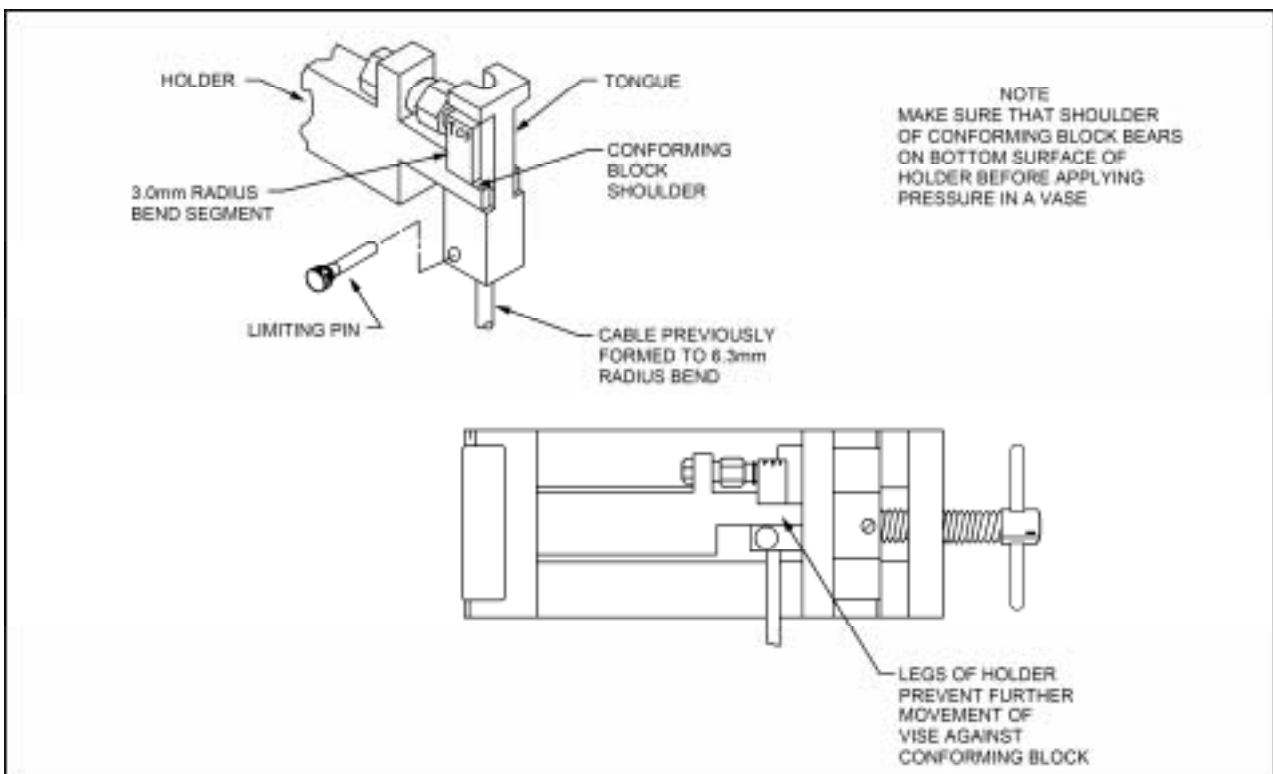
3.2mm Radius Bends on RG-402/U Cable
